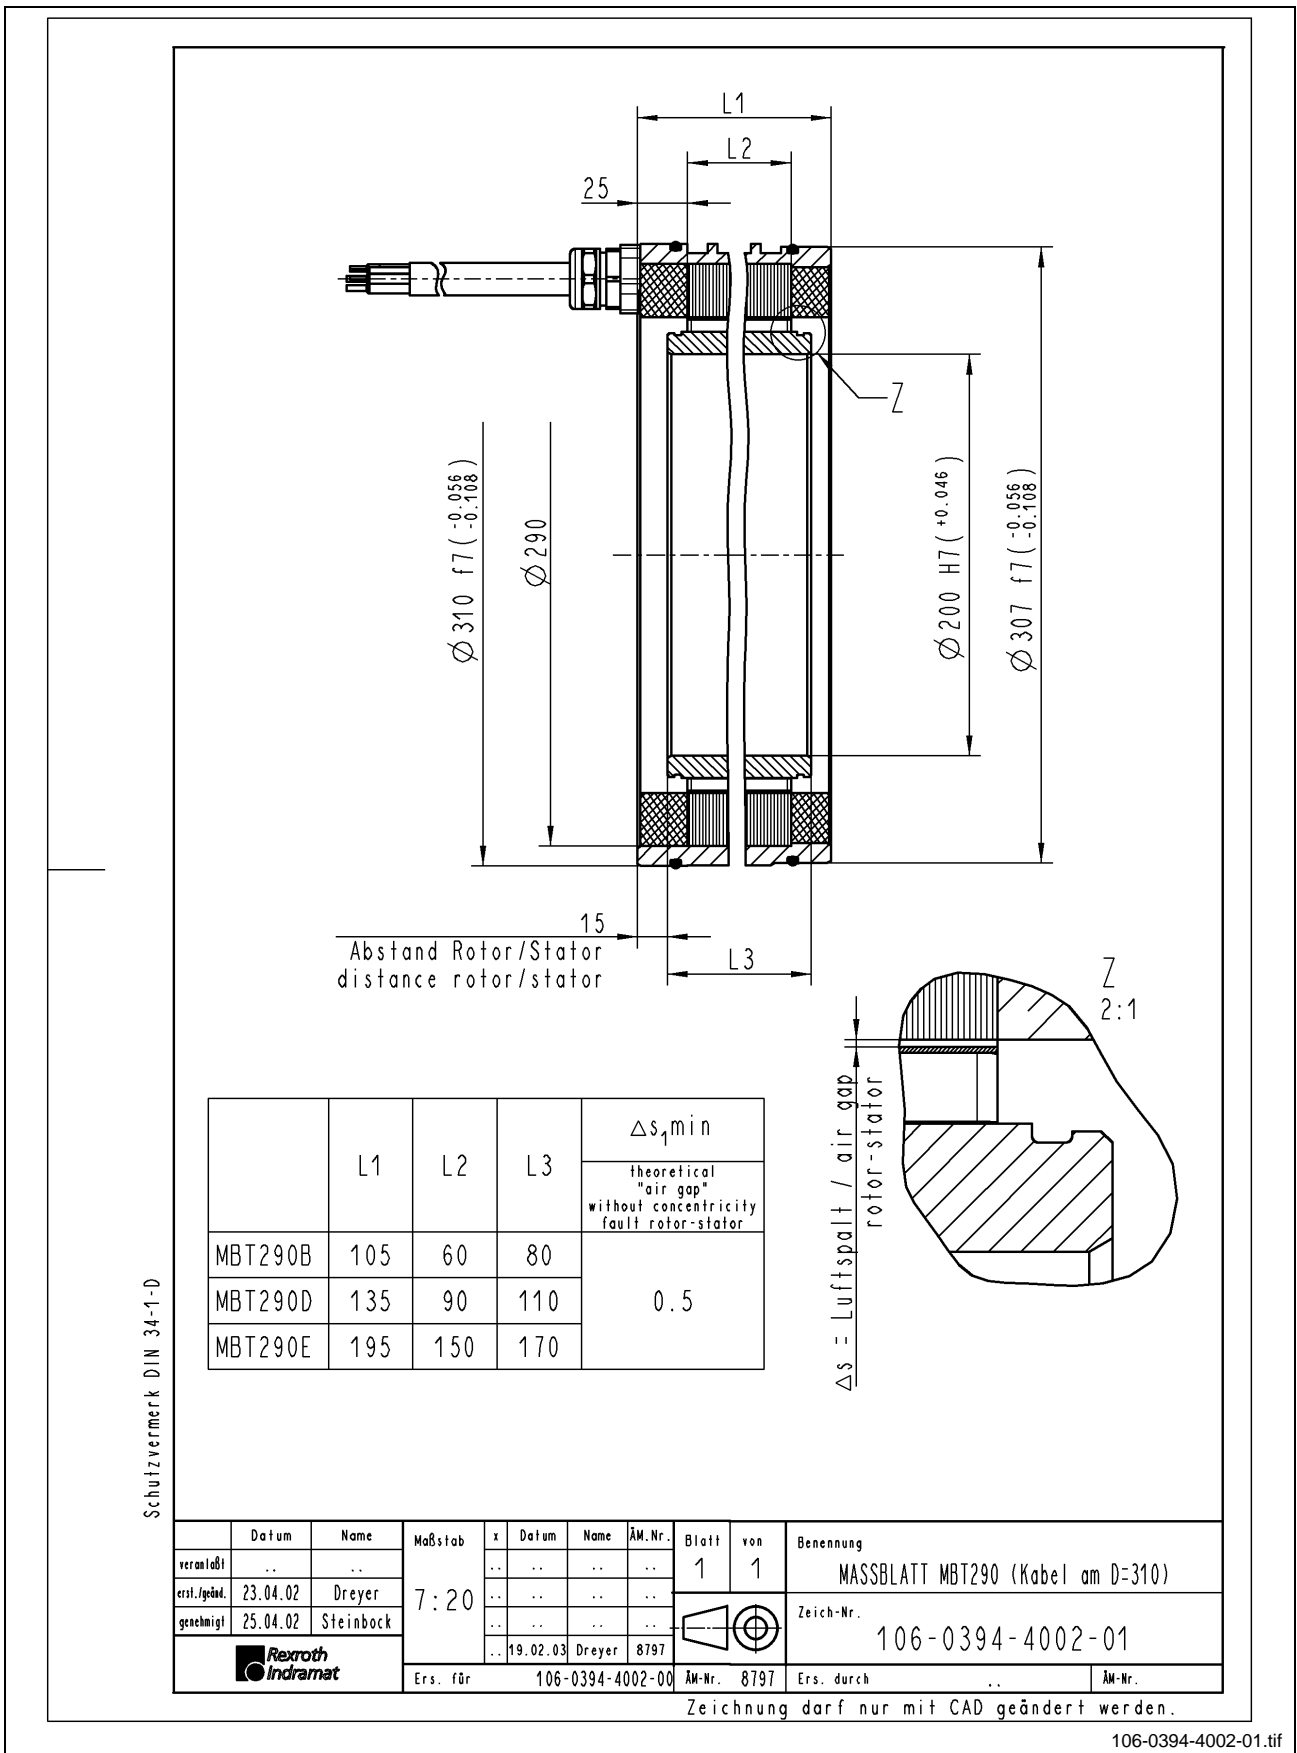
Dimension sheet size 290, electrical connection "CN"
